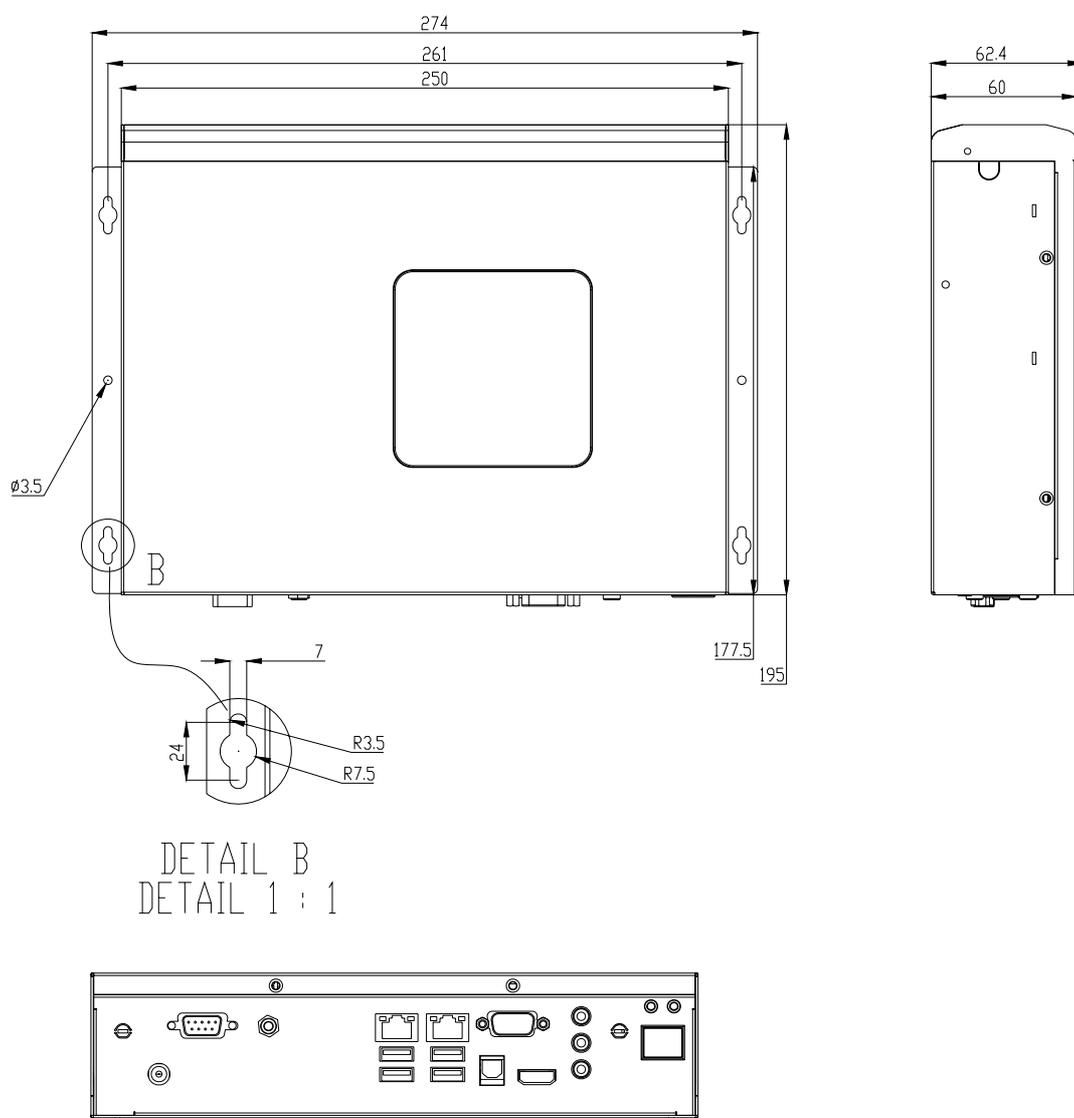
ARK-DS350 Mechanical dimension drawing
